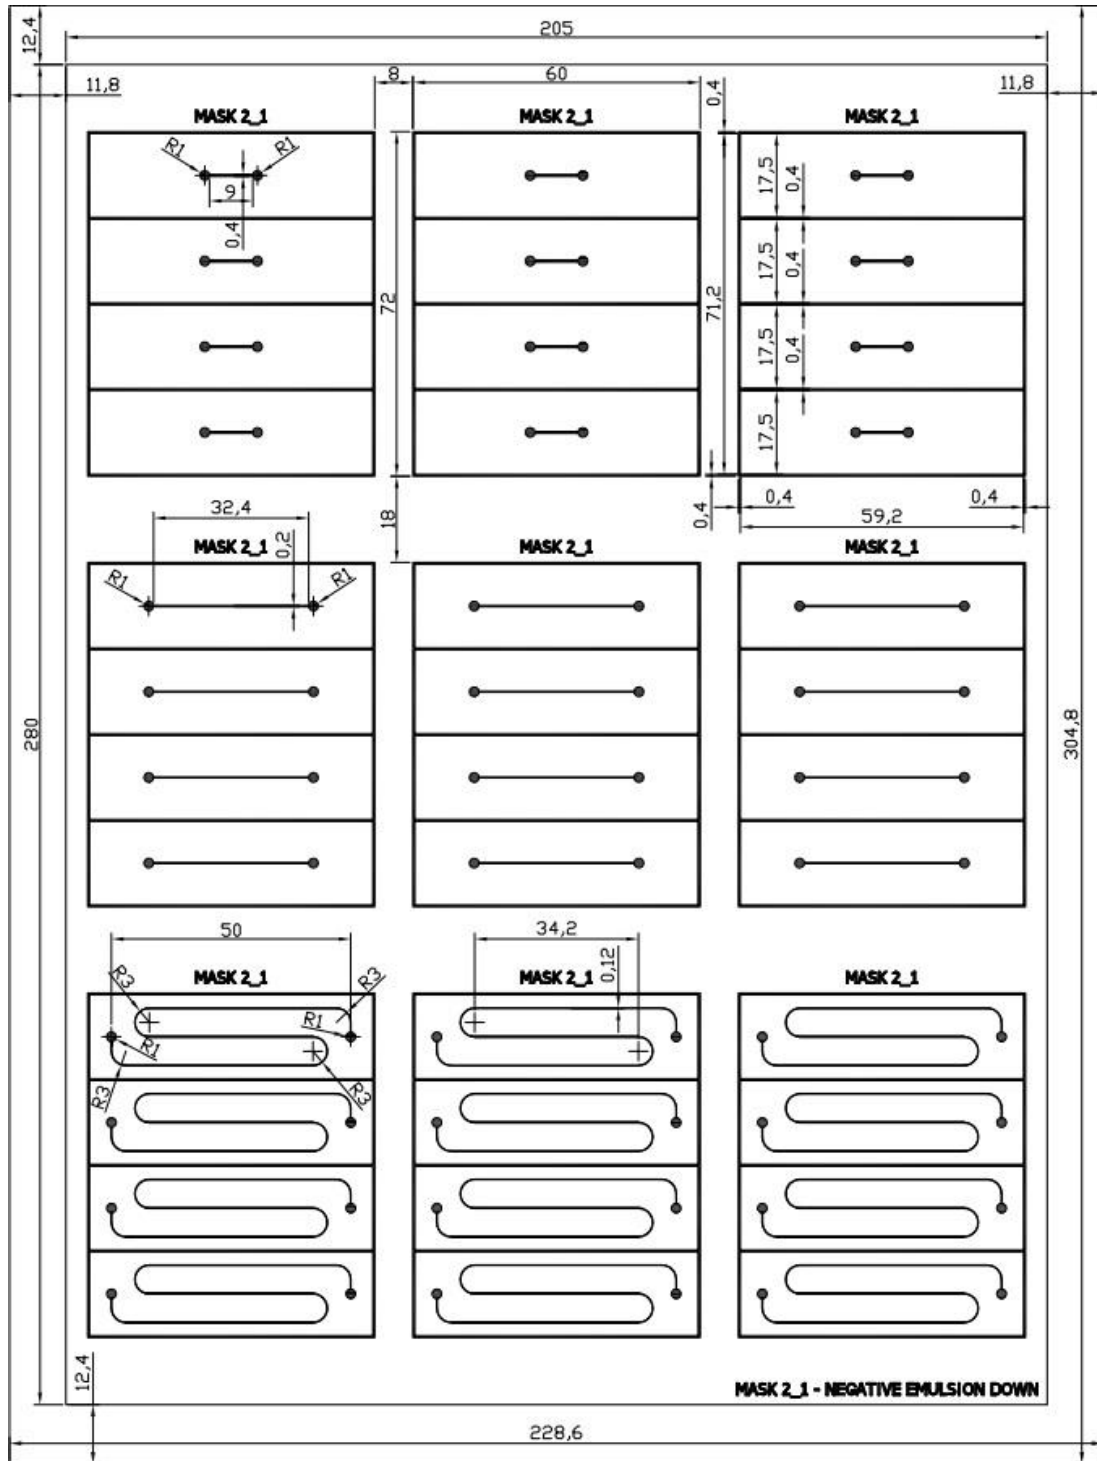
ISO technical drawing of the mask (dimensions in mm).
